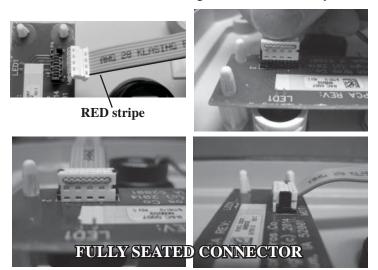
Connecting the CABLE to the INDICATOR BOARD
